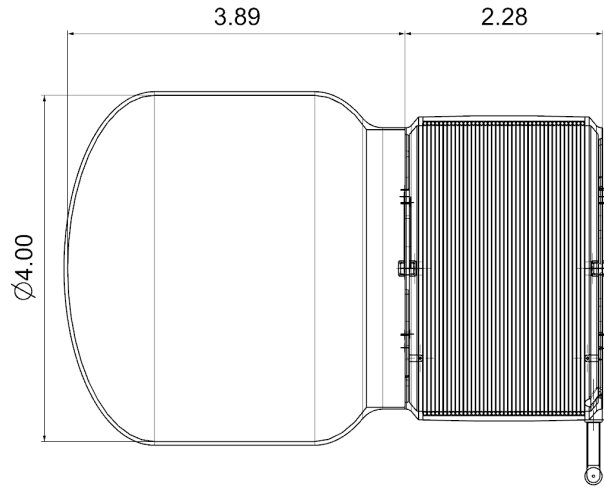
Surface 20 m^3 Dimensioned External Drawing, units in meters
